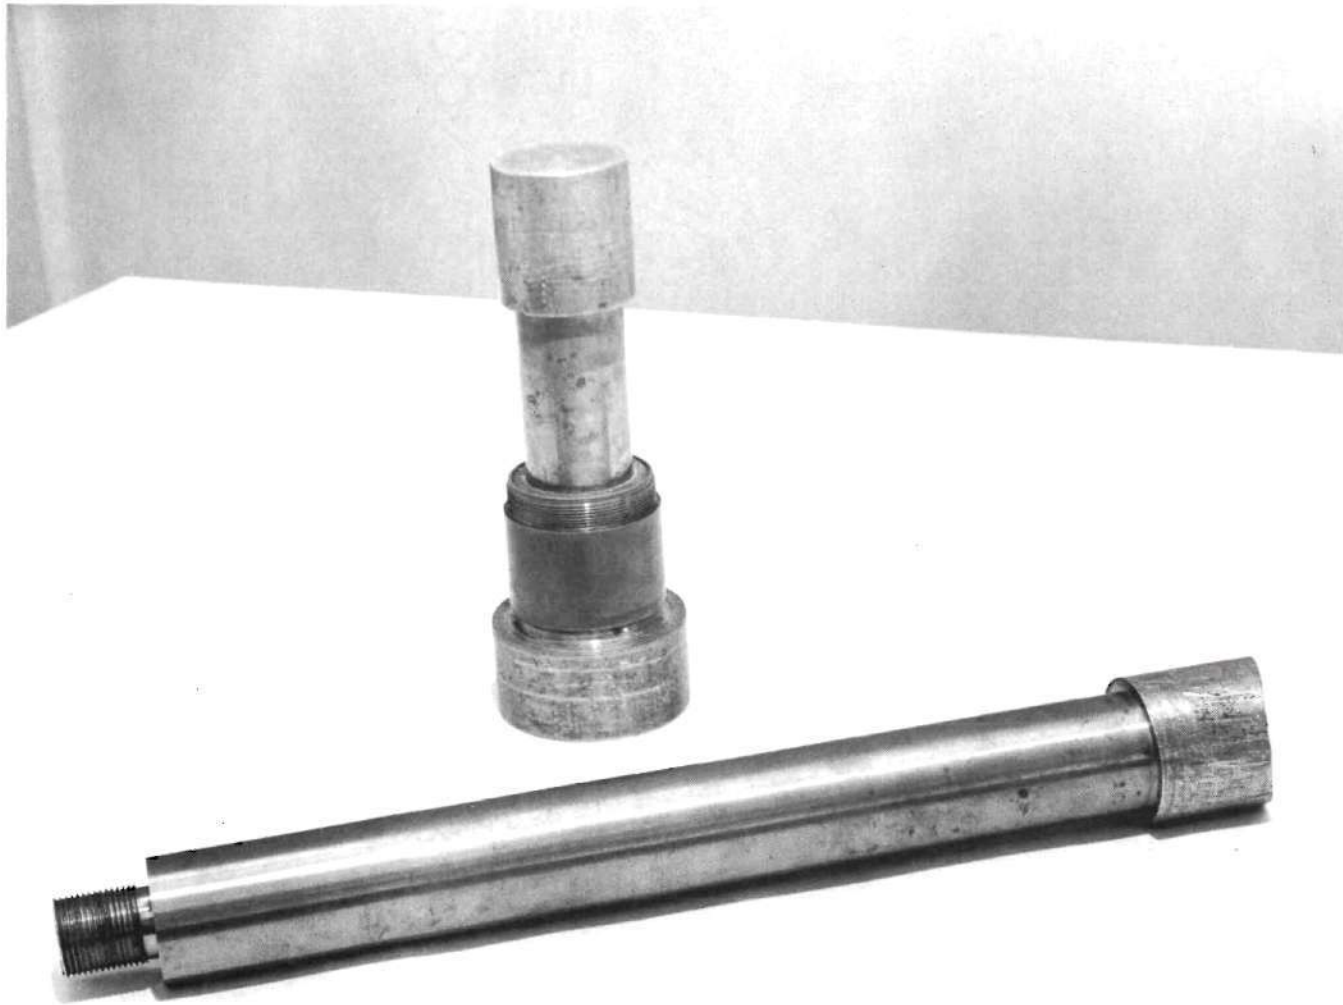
Assembled Mold with Long Center Piece in Foreground.
